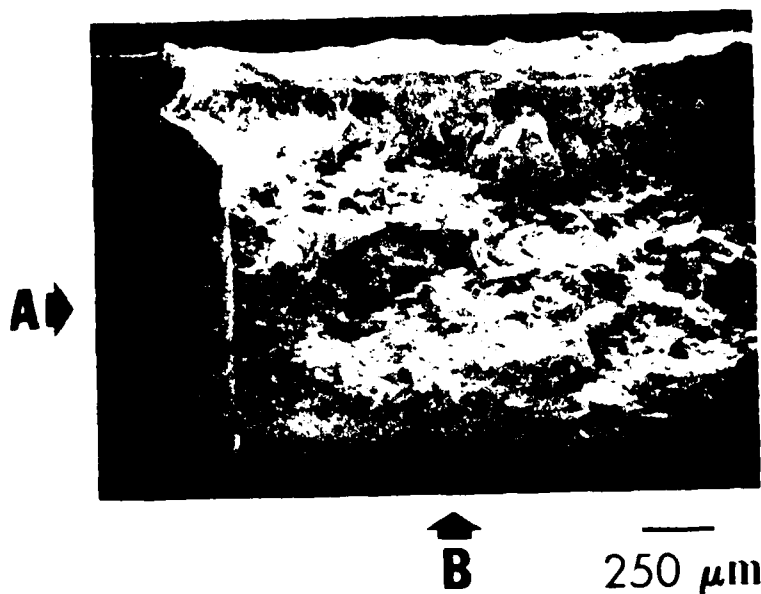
Fracture surface resulting from Region A behavior near specimen's notch (A). Bottom arrow (B) indicates direction of crack growth. Top of specimen exhibits ductile tearing on fracture surface.
